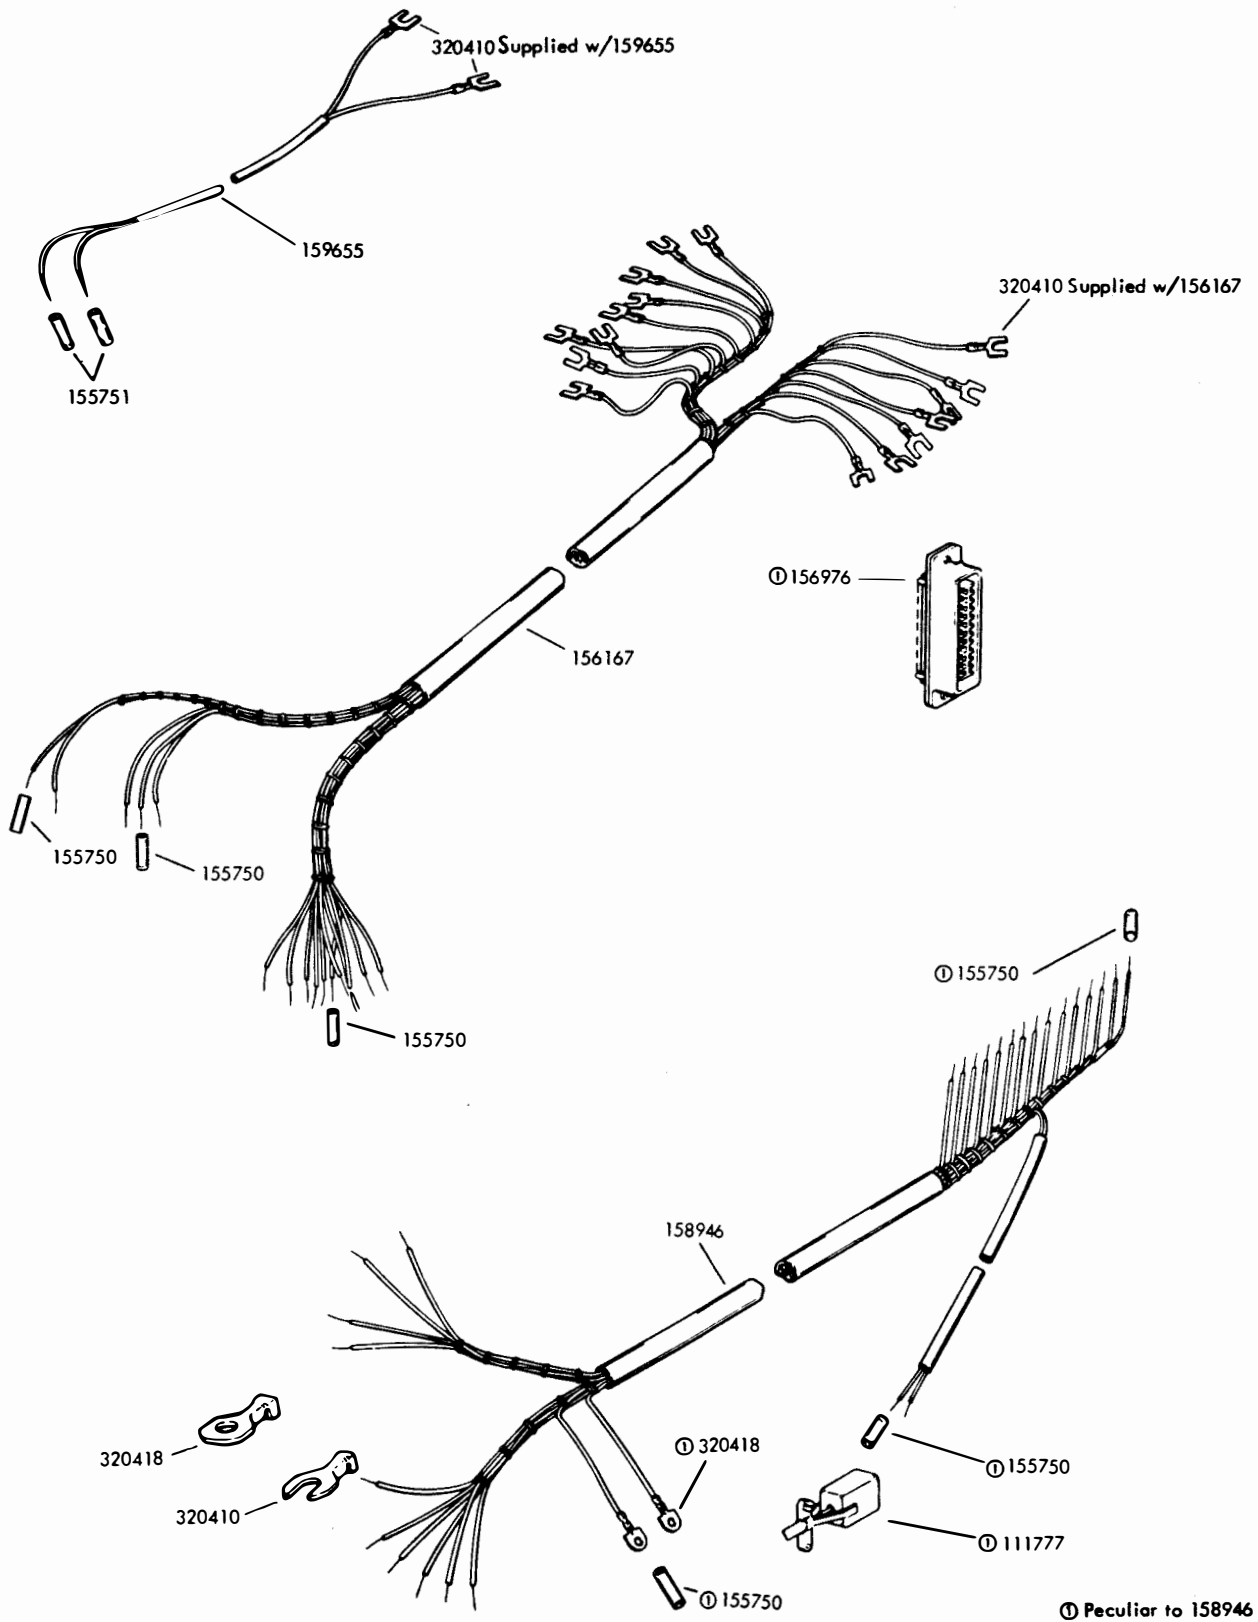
Cables (Typing Reperforator) (Sheet 2 of 2)
